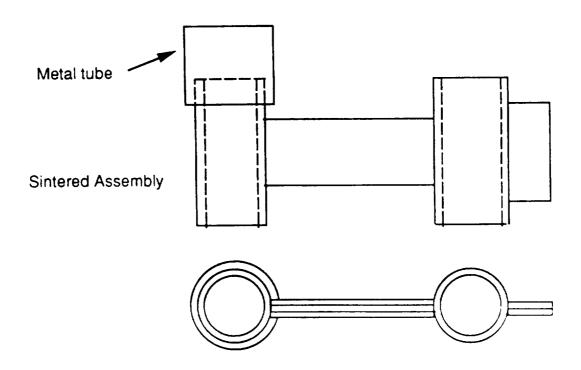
Top View Shows Overwrap Assembly After Green Machining to Trim Off Excess Material. Bottom View is Assembly After Sintering. A Metallic Tube is Shown Brazed Onto One Inlet. One Tube Was to Be Brazed to Each Outlet for Controlling Methane Flow
